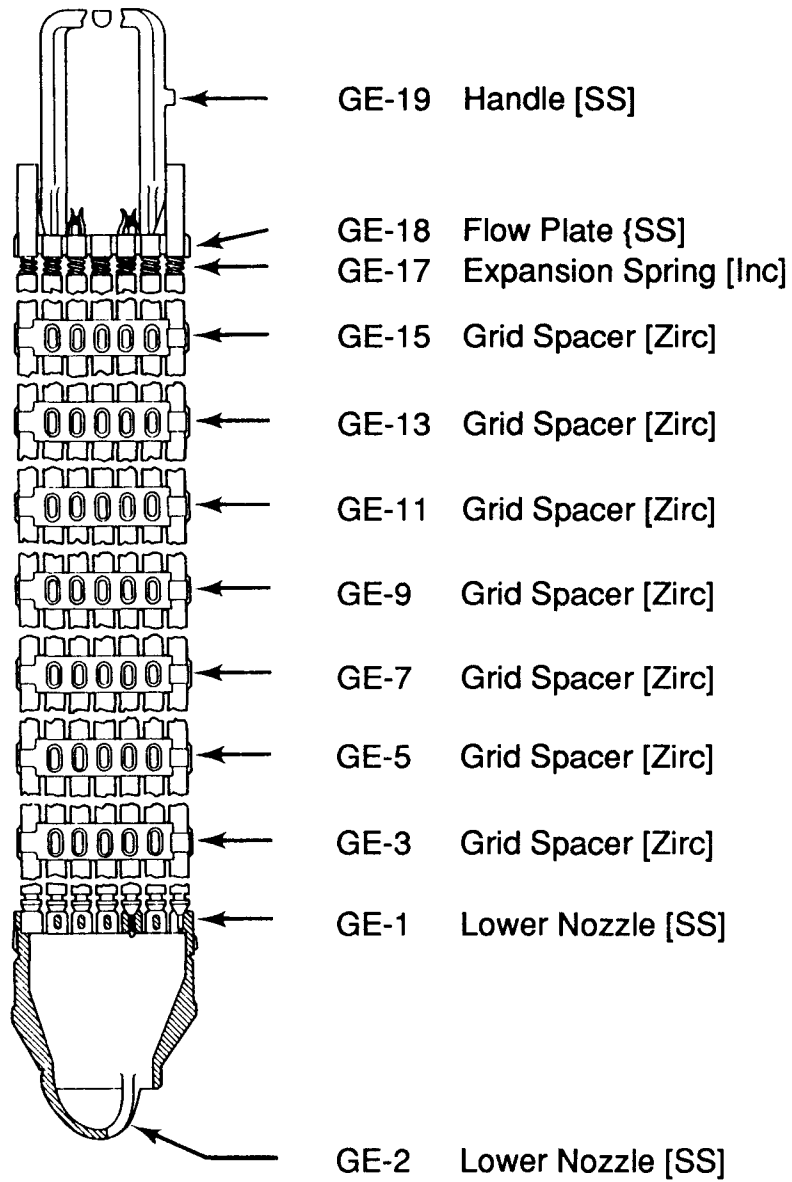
Sample Locations for the General Electric 7x7 Fuel Assembly
